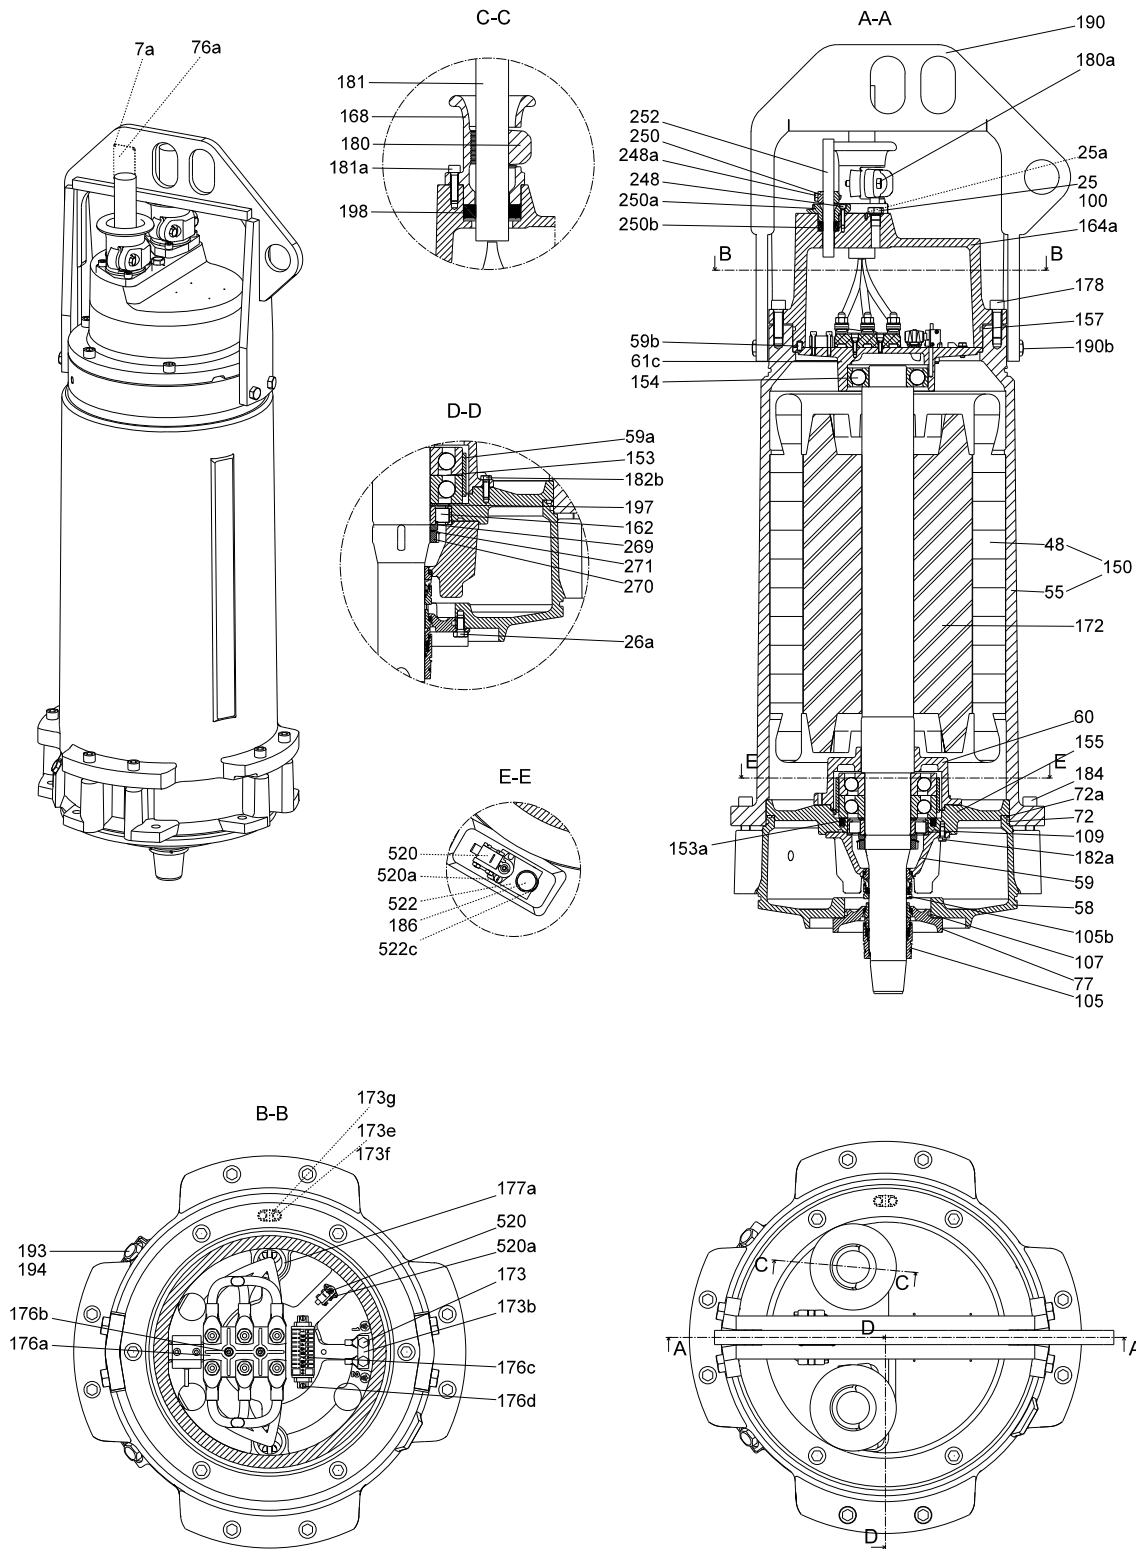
Explosion-proof motor without cooling jacket (installation type S)
